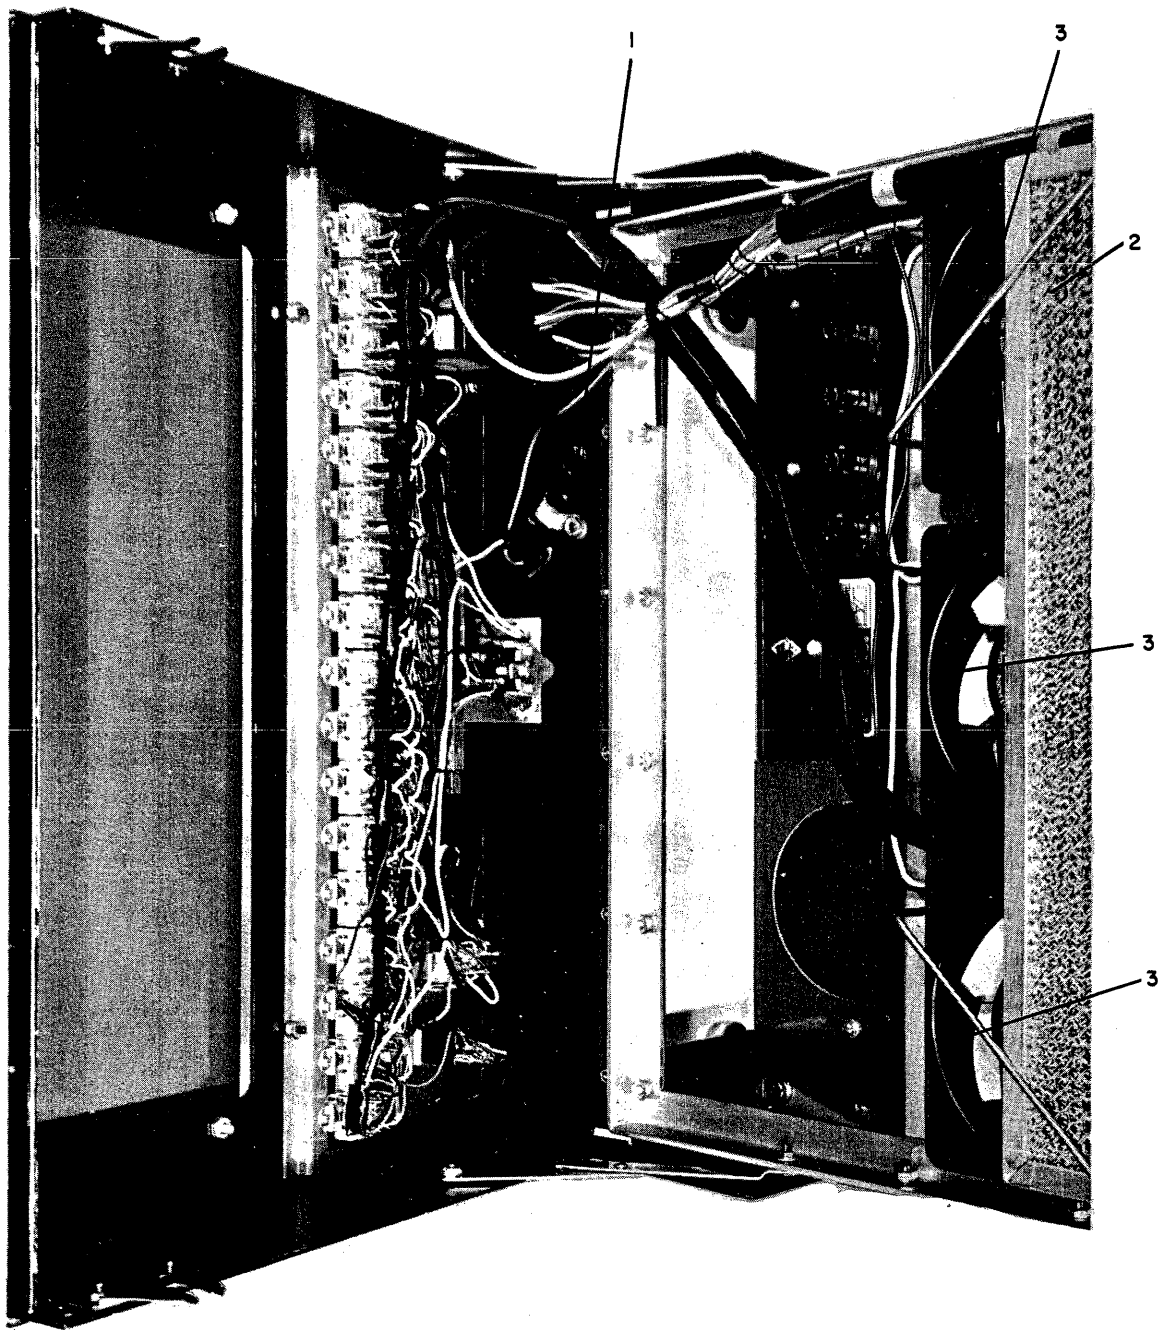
Chassis Assembly, Types 316-0100 and 316-0110
